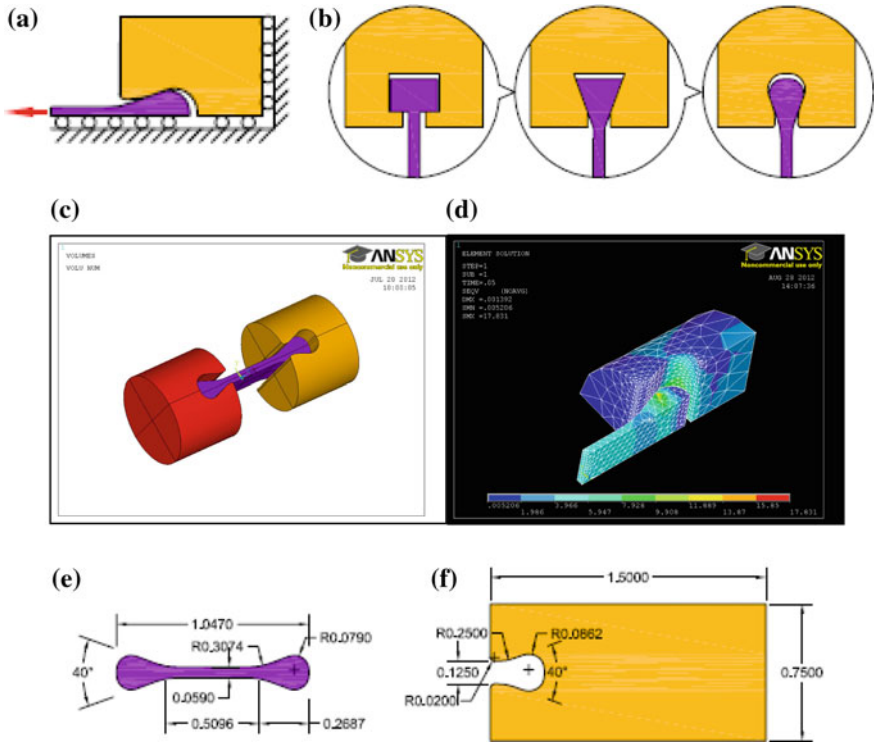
a Development of direct tensile specimen geometry, b boundary condition applied in stress analysis of specimen and fixture assembly, c ANSYS model, d von-Mises stress distribution in ANSYS simulation, e specimen dimensions, and f fixture dimensions (all dimensions in inches)
